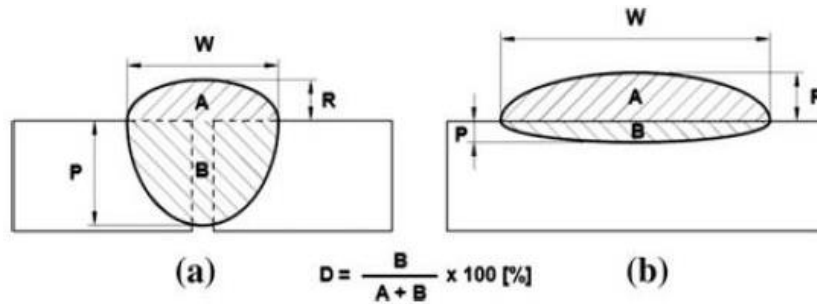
Desired weld bead geometry: (a) union joint (typical applications) and (b) cladding as shown in Gomes (2012).
